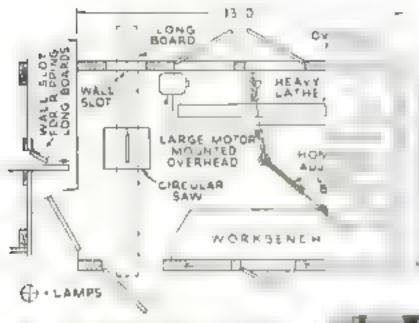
Plan abowing arrangement of squipment in a shup but as an extension to a garage. The exterior may be seen in Fig. 2
